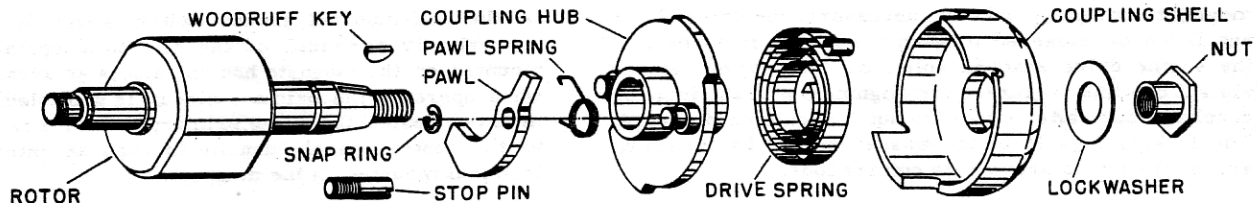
Magnetic Rotor and Disassembled Impulse Coupling
